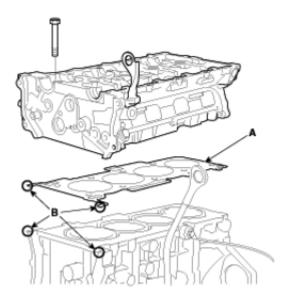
Identifying Cylinder Head Gasket On Cylinder Block Courtesy of HYUNDAI MOTOR CO.
